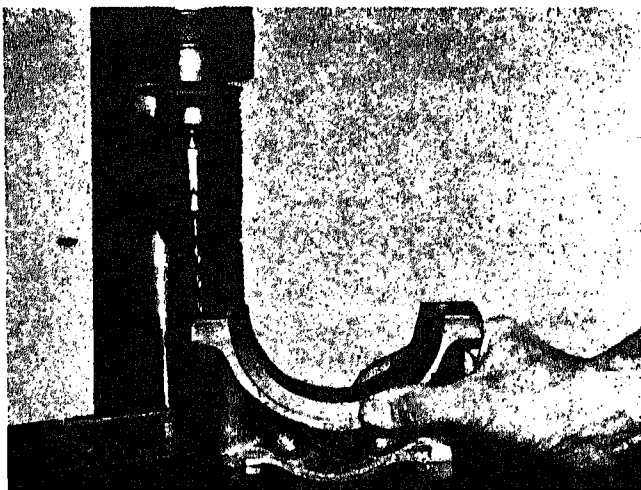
Drilling dowel hole in rear main bearing cap
